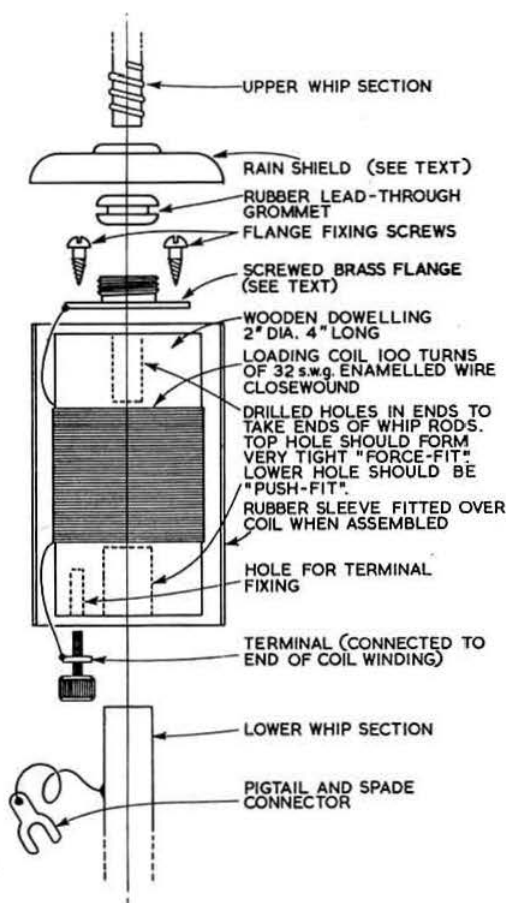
This "exploded" sketch shows the method of constructing the loading coil and connecting the rods to it.
